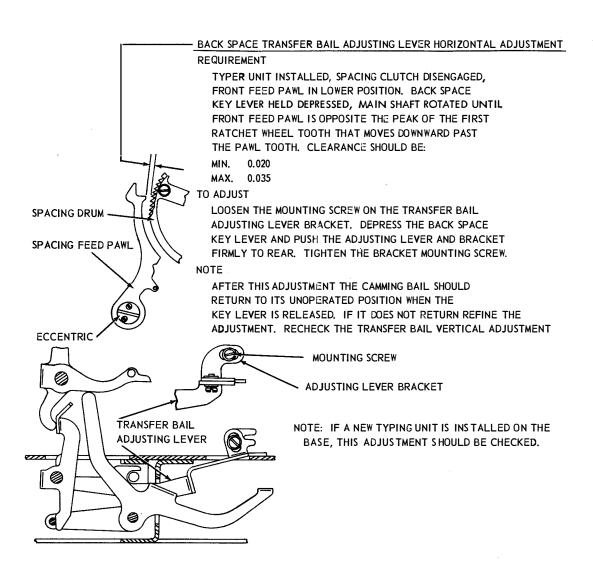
KEYBOARD, BACKSPACING MECHANISM
